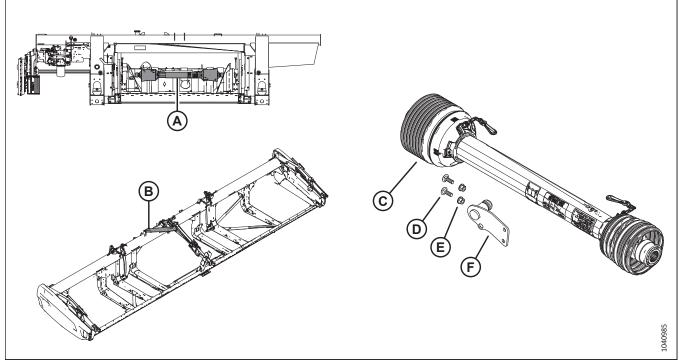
Driveline Shipping Locations and Driveline Parts
